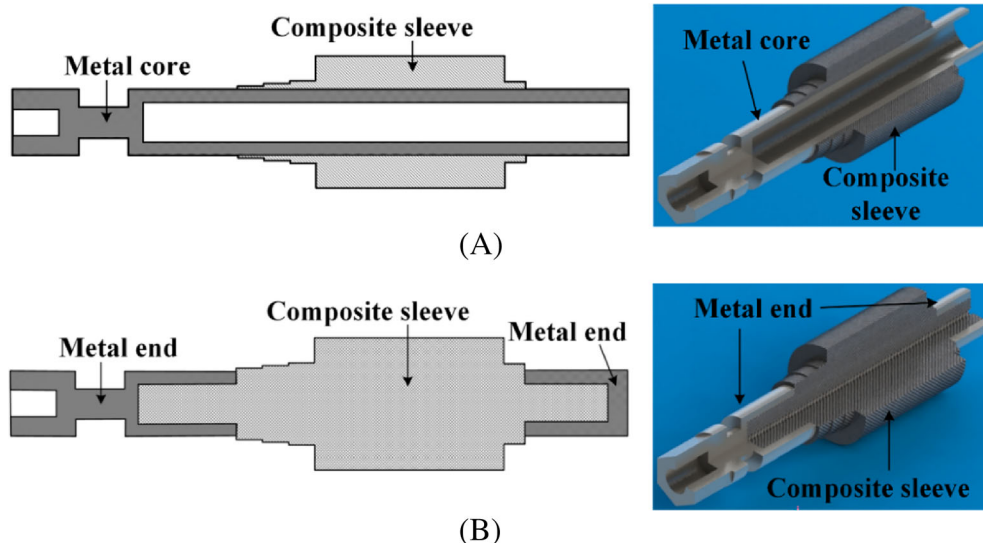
Schematic view of two composites-metal hybrid shaft specimens (dimensions in mm). (A) shaft with metal core, (B) shaft without metal core.
